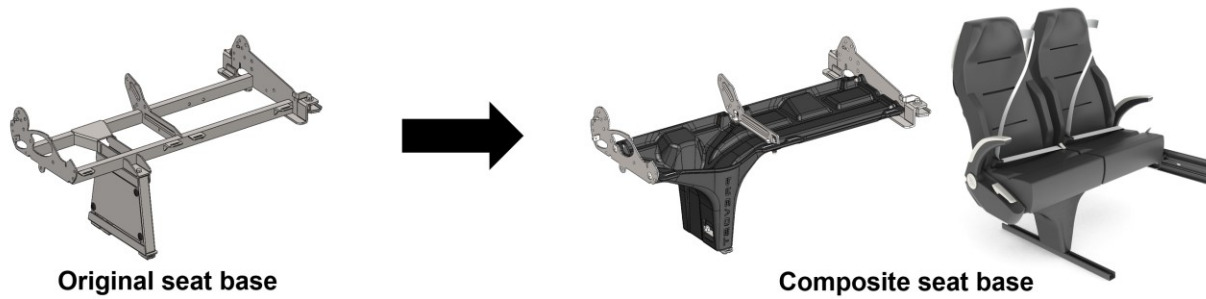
Original welded steel assembly design and the corresponding composite design.
